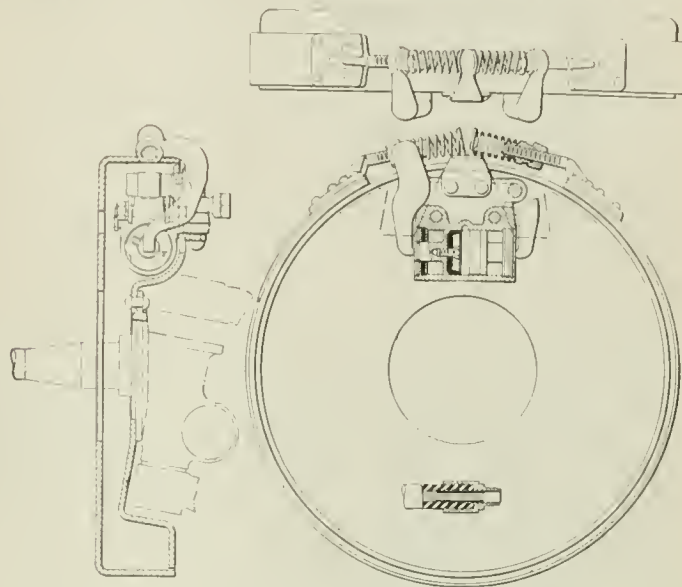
WHEEL CYLINDER GROUP ASSEMBLY WITH A SECTION OF THE HOSE END SHOWN IN THE LOWER SECTION
